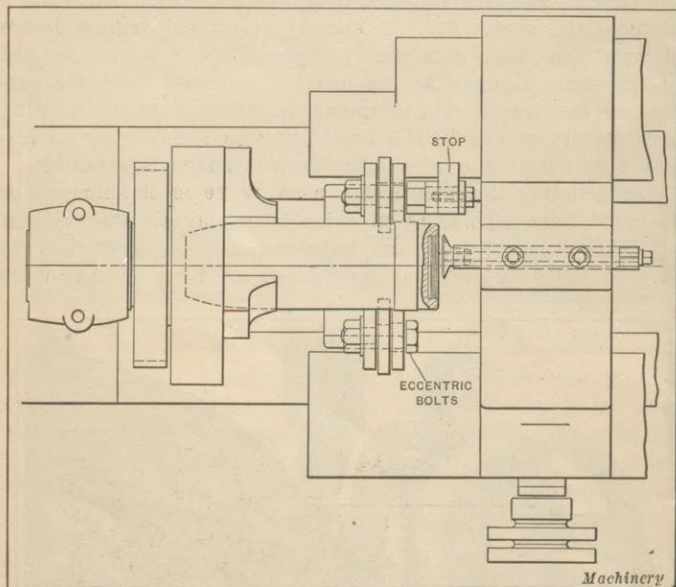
Threading Base End of Bar Stock Shrapnel Shells in "Automatic" Threading Lathe
